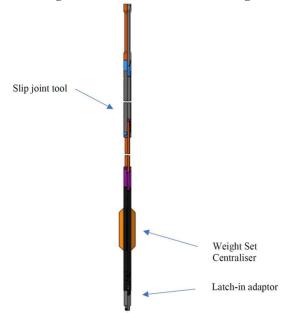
Stabbed in inner string cementing bottom hole assembly "BHA"
